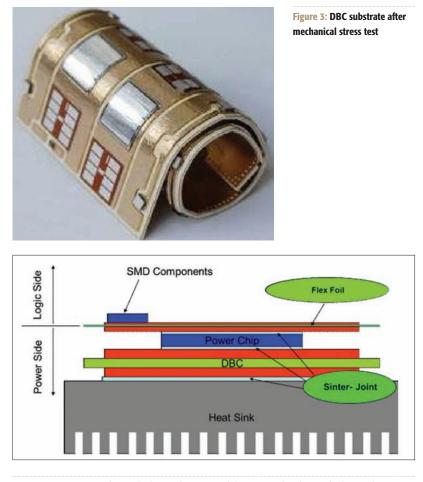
Cross section of a newly designed power module integrated with a pin fin heat sink exhibiting no solder layers and wire bond interconnects
